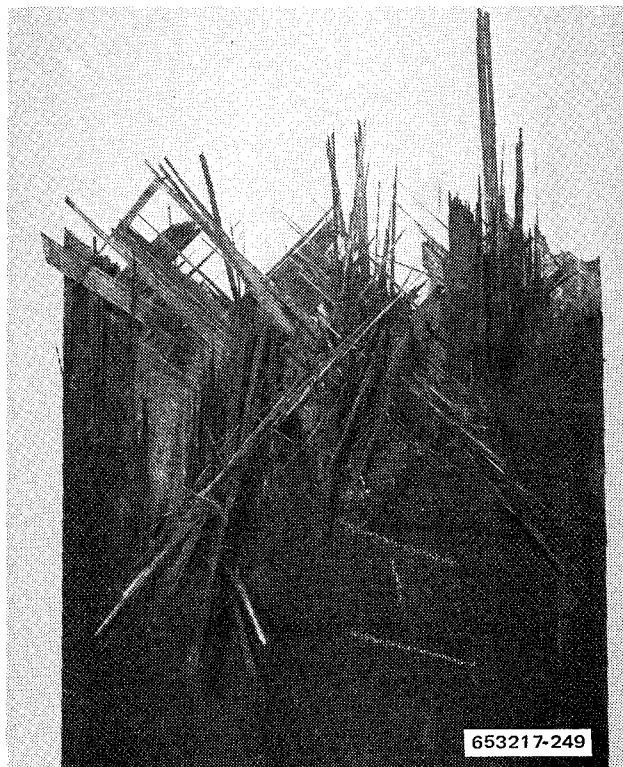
G/E Long-Term Specimen BC91-1 Showing Fracture Appearance After Failure in 4515-hr
